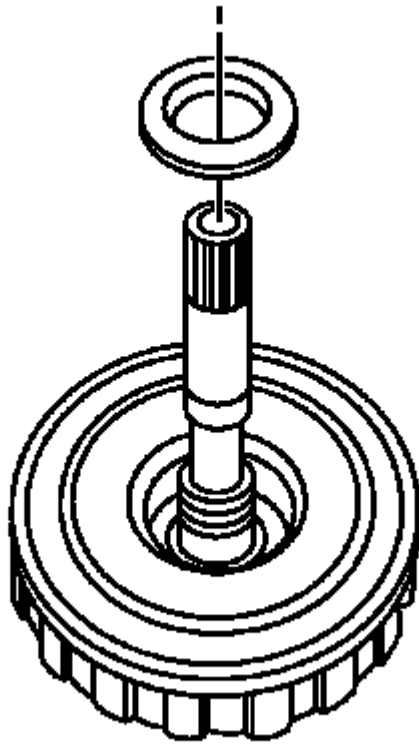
Thrust Needle Roller Bearing & Direct Clutch Assembly
